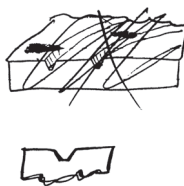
is a mandril with sunken thread used in the Center of a mould for pouring phonograph cylinders 45 shews the sunken thread fig 46 The phonogram blank with internal thread fig 47 a section
